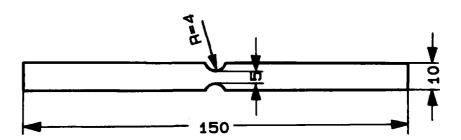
Test specimen. 5 mm thick. (dimensions in mm)
